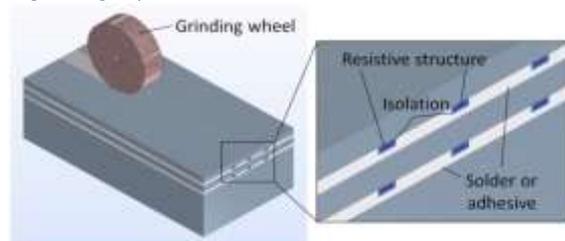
Schematic illustration of in situ measurement with a sensor integrated workpiece in a surface grinding process [2]
